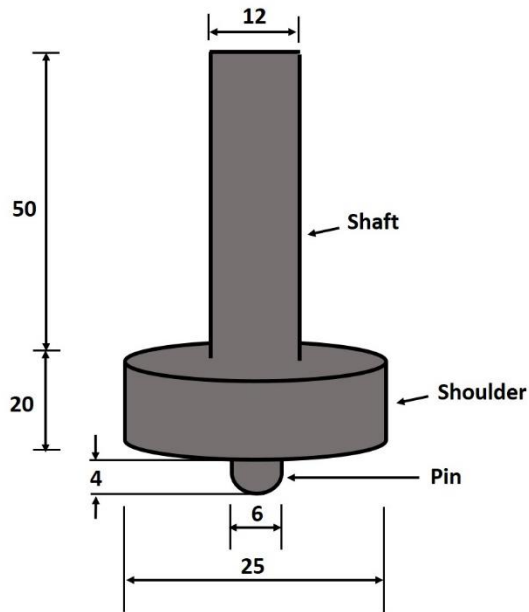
Tool used in friction stir welding (dimensions in mm).
